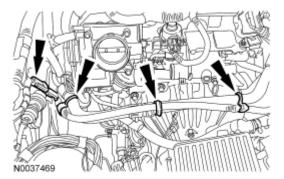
Locating Block Heater Electrical Connector Harness Retaining Clips Courtesy of FORD MOTOR CO.
